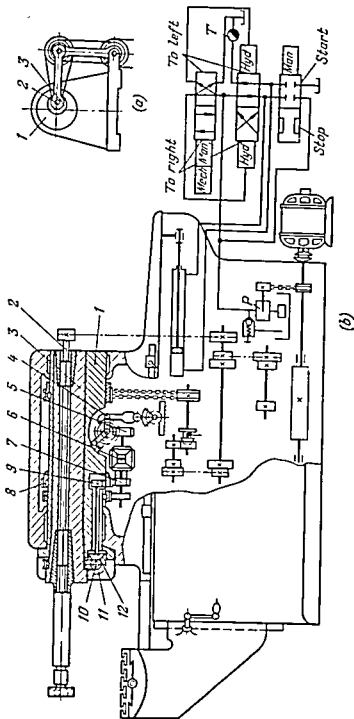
Combined hydraulic circuit and gearing diagram of a planetary-type internal grinder
